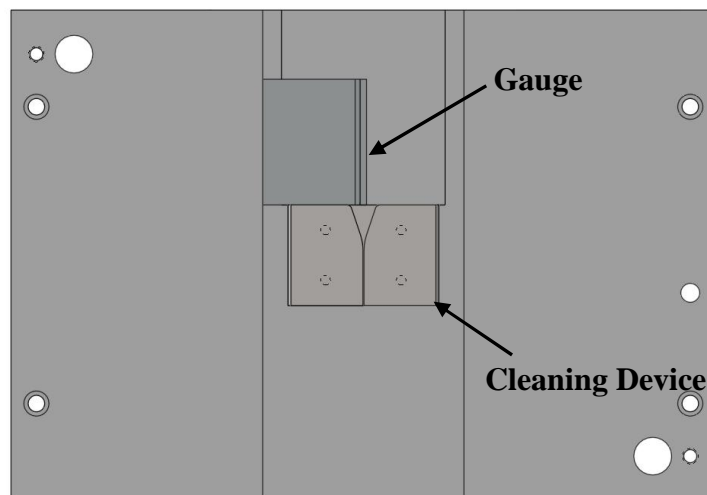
Top view of Base Plate with Cleaning Device and Gauge in place.
